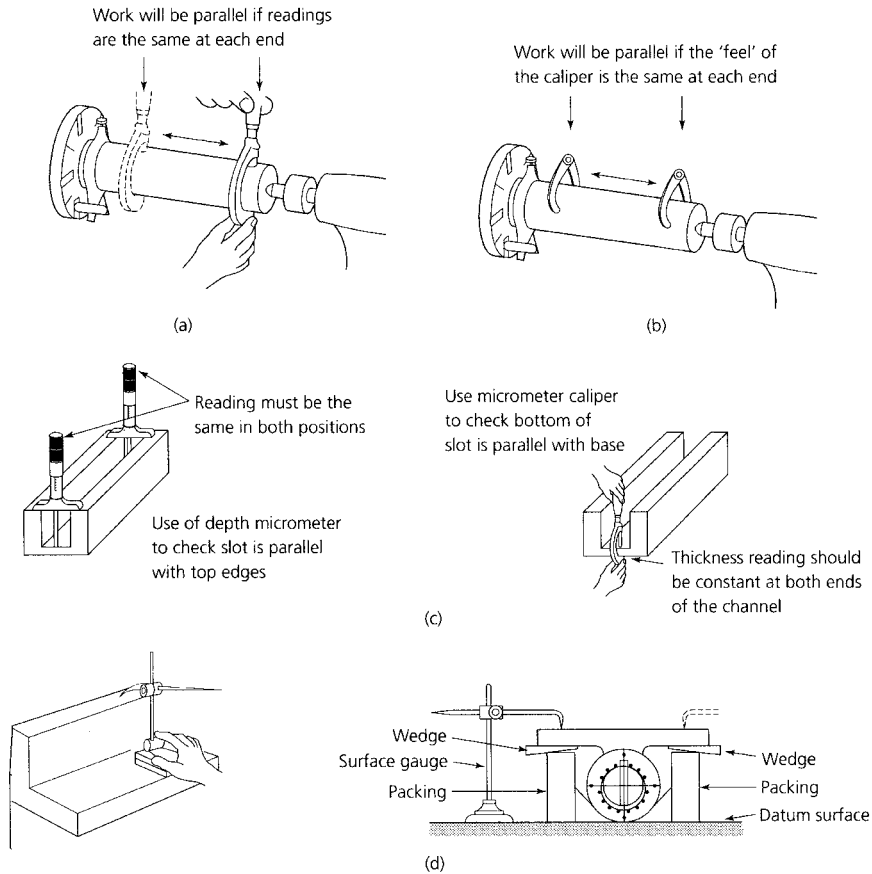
Checking for parallelism: (a) with an indicating instrument (micrometer); (b) with a non-indicating instrument (caliper); (c) rectangular components; (d) with a scribing block (surface gauge)
